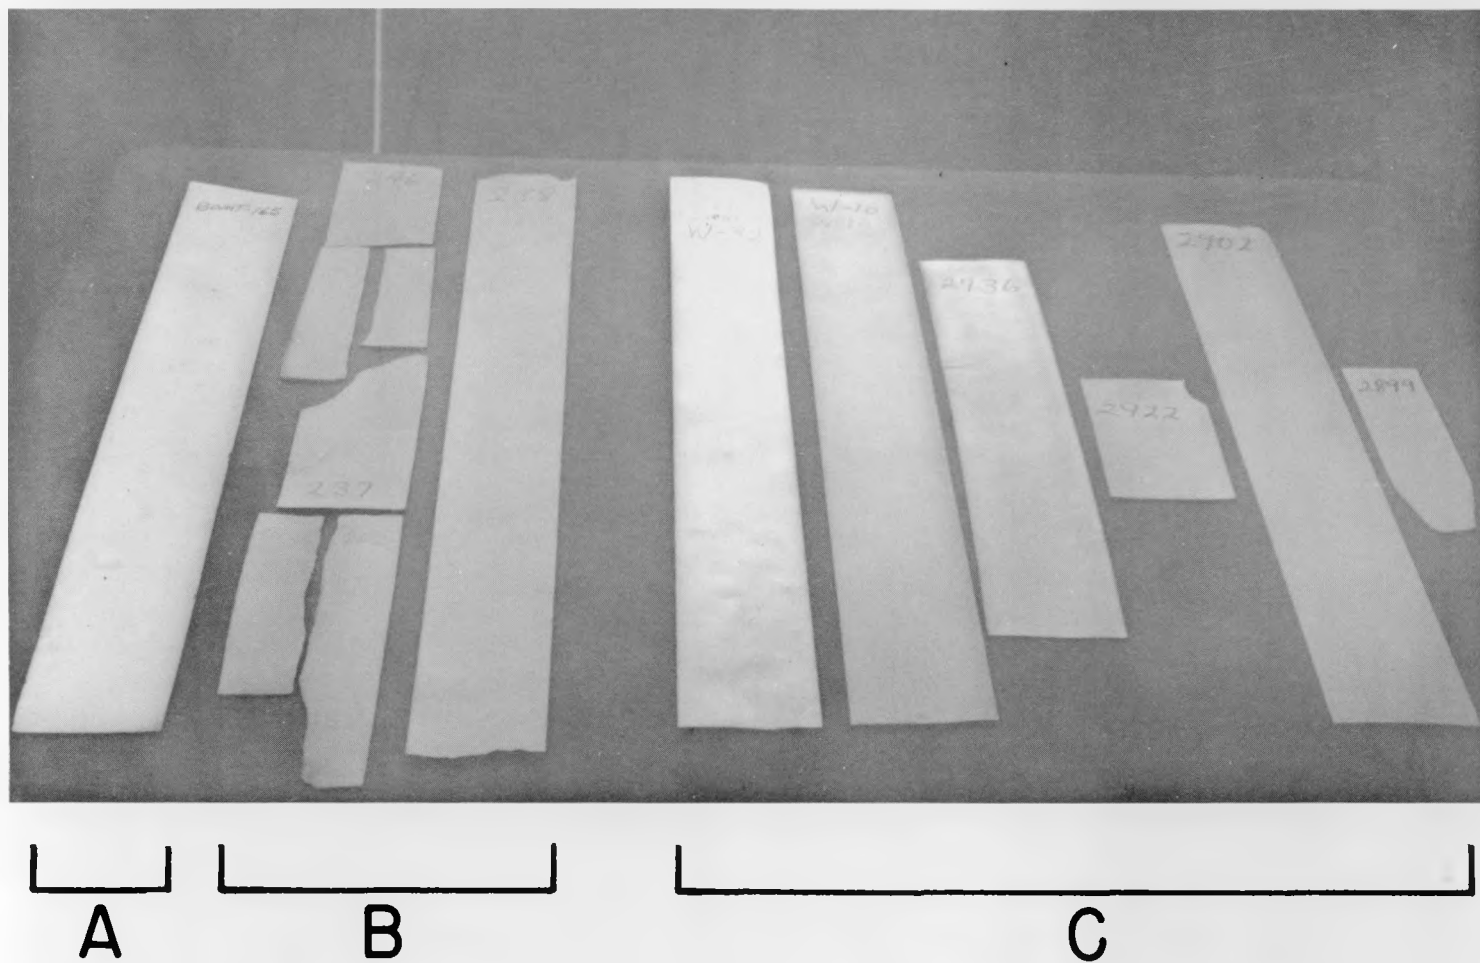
Sintered (1700°C, 3090°F) pieces of 2 in. wide strip:
